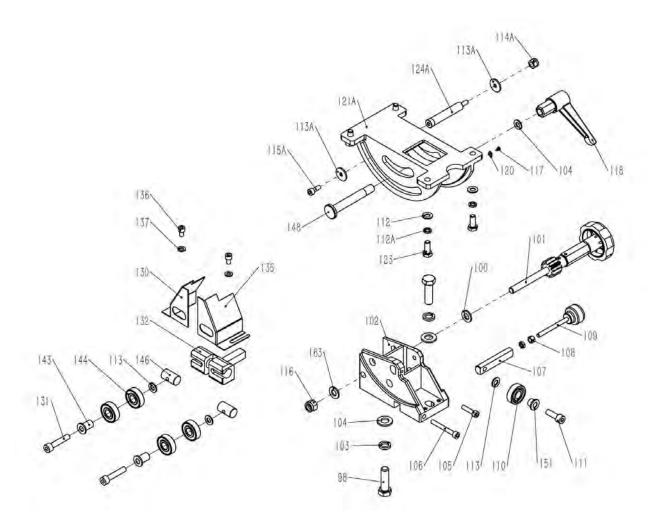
Spare parts drawing 1 - Wood Band Saw HBS 471 / HBS 473
